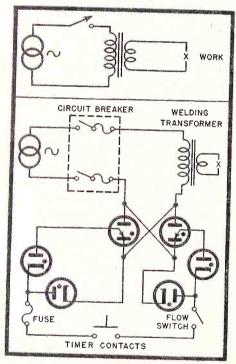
(below, top half): Simple resistance welding circuit.
